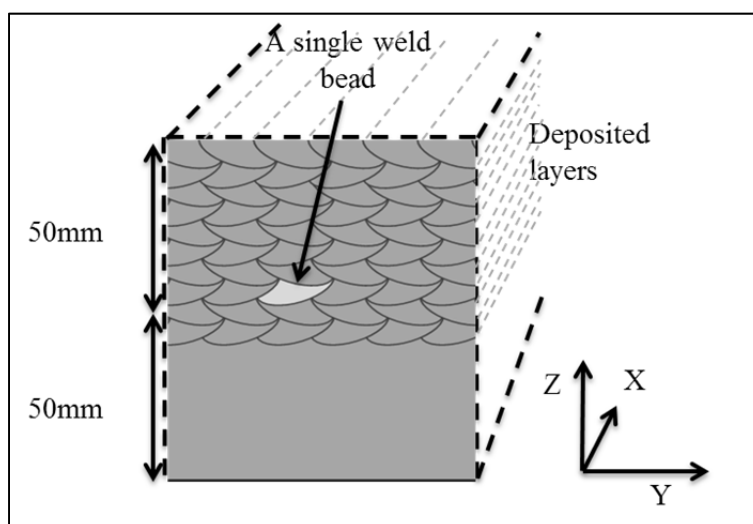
Schematic cross-section of the weld layers.
